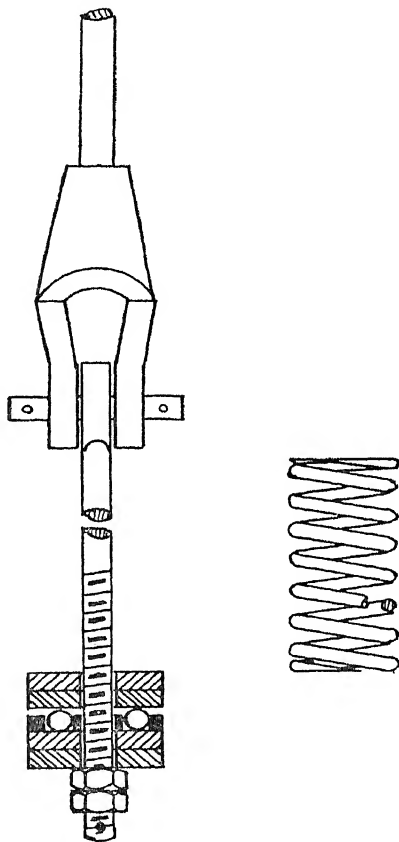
Spring-loaded draw bar fitted with ball bearings. Reproduced from *Elevators* (Jallings).
